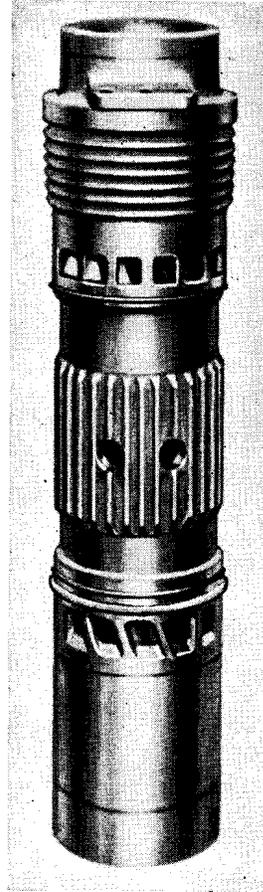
Cylinder Liner, Opposed-Piston Engine.
